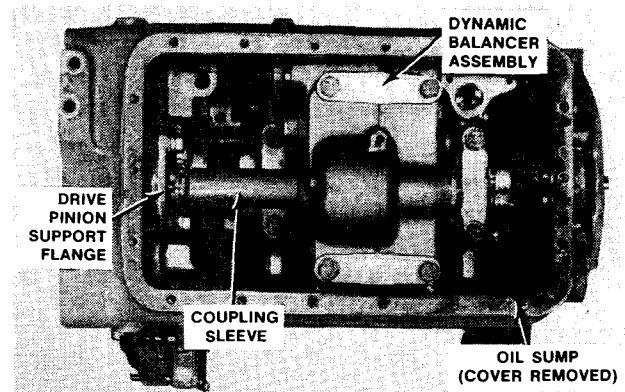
Dynamic Balancer Assembly (SSD-437)
